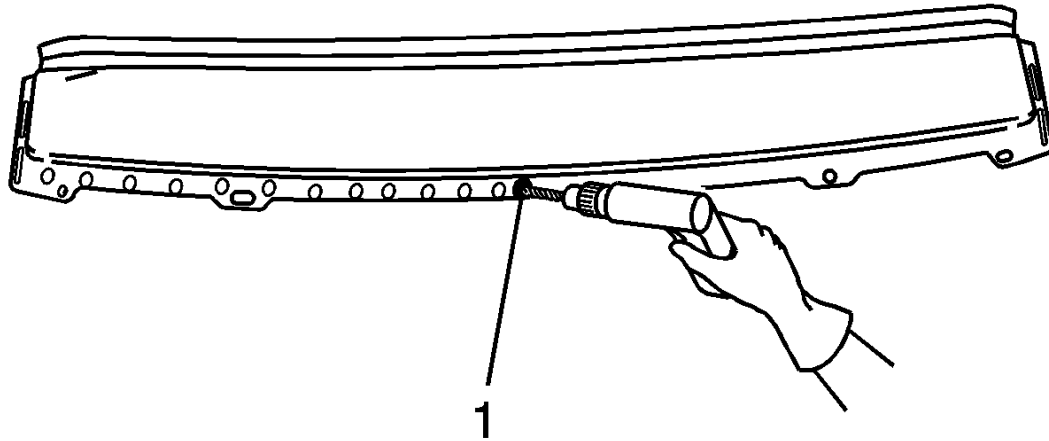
Drilling Plug Weld Holes (Full Panel)
